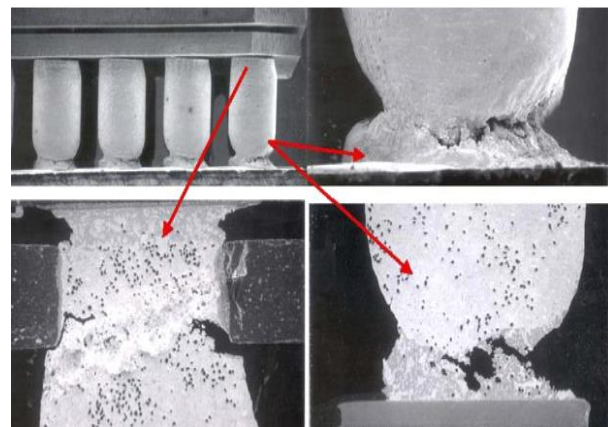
Crack growth in solder joints near PCB [21]
